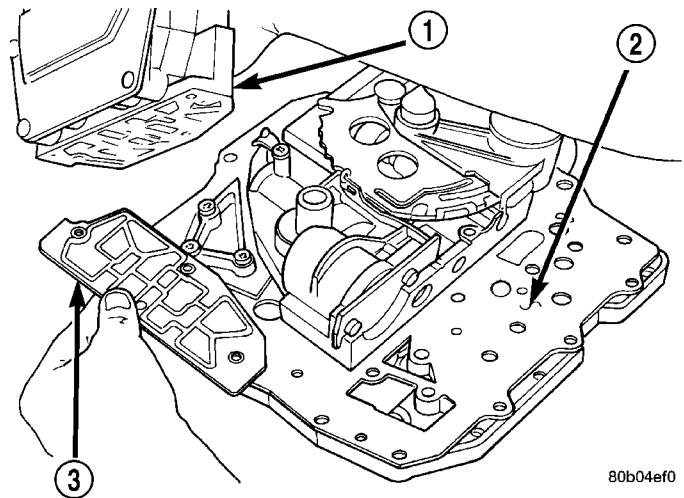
Solenoid/Pressure Switch Assembly and Screen
